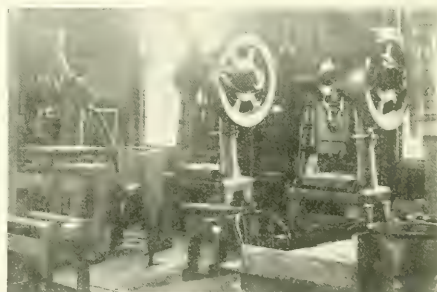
EMBOSSING PRESSES WHICH PRESS THE DESIGN ON THE DOUBLE COMB BLANK
